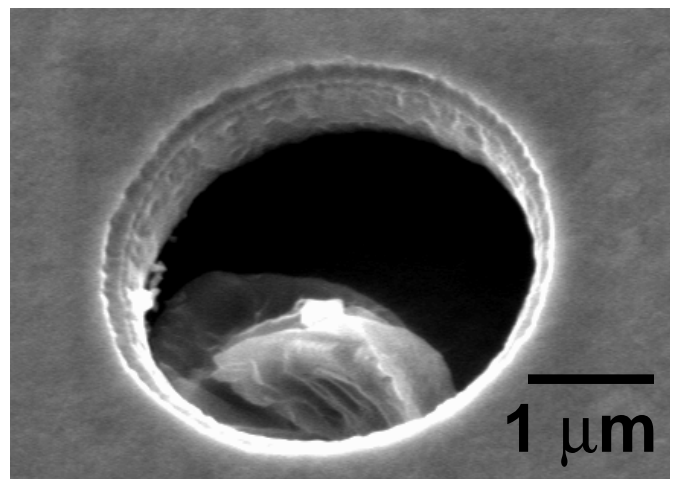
Undamaged side wall of pin hole in drive gear on control sample (SEM). This gear was not stressed.
